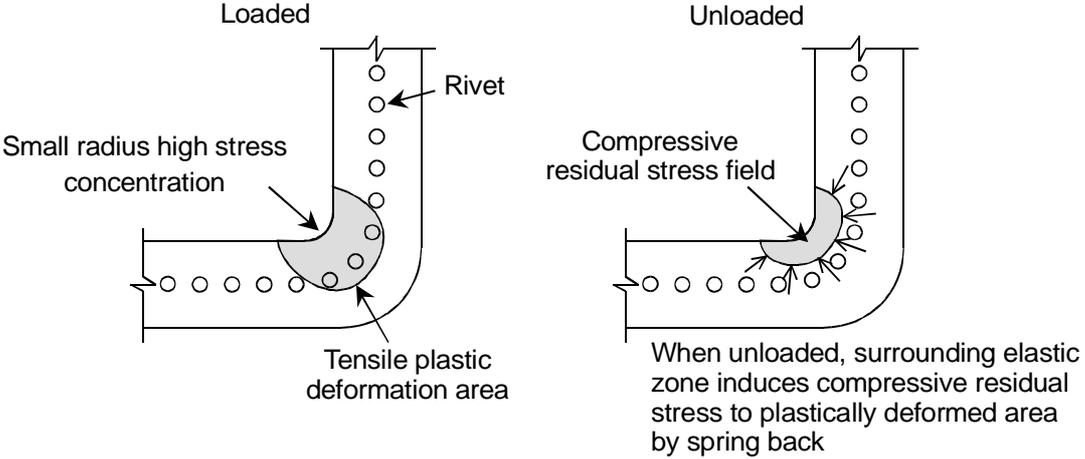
Deformation at Window Corner by Loading and Unloading of Overload.
